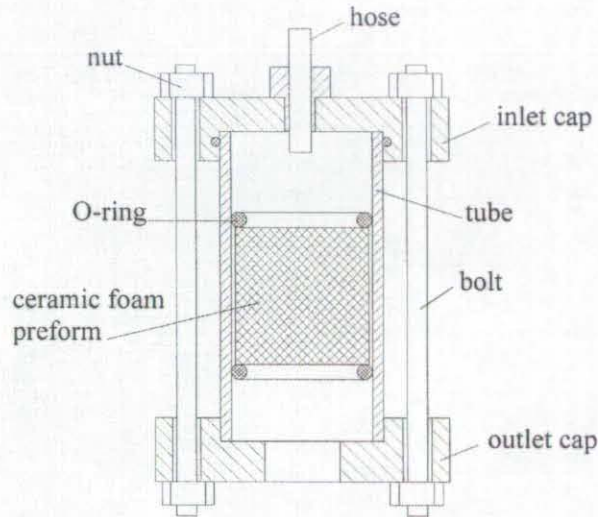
A drawing of the assembly for the vacuum assisted infiltration technique.
